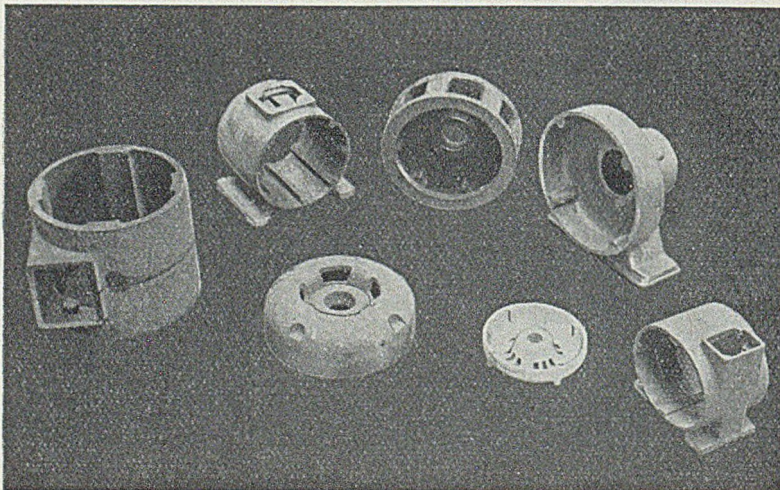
Group of Electric-motor Castings in Iron and Light Alloys.
